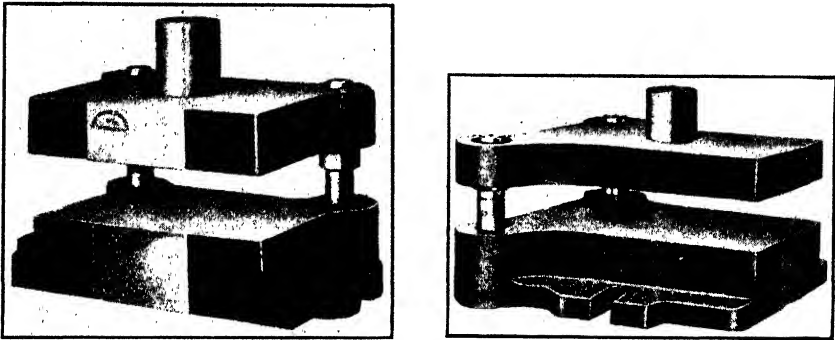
A standardized die-set including guide pins for accuracy and convenience in setting dies. *Courtesy Danly Machine Specialties, Inc.
